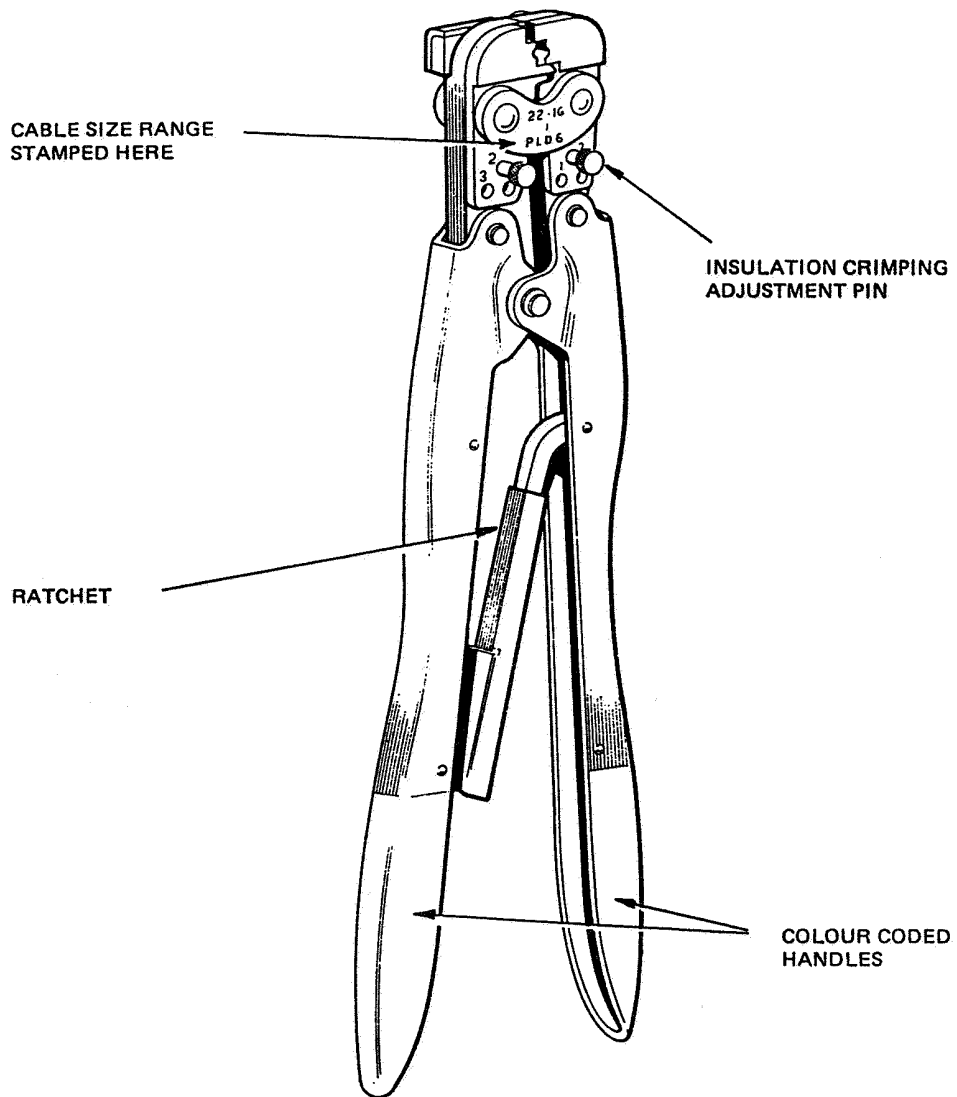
EXAMPLE OF A HAND OPERATED CRIMP TOOL
